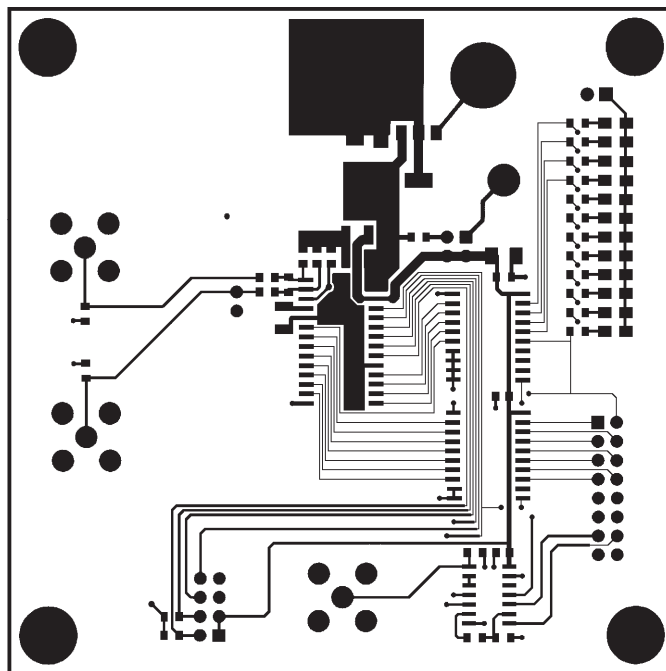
Suggested Evaluation Circuit Board Component Side Layout
